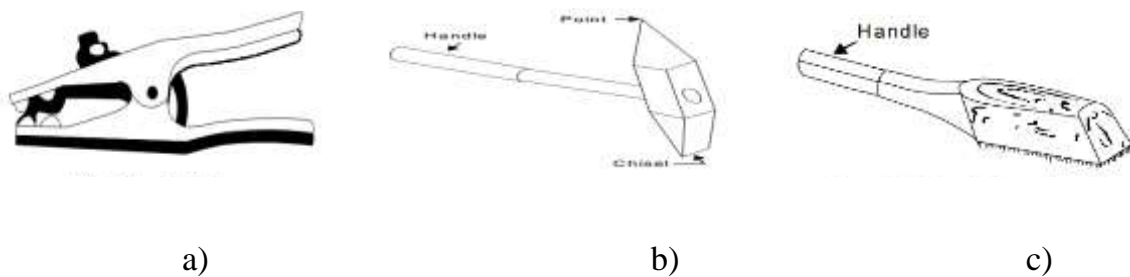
Some arc welding equipment a) Earth clamp b) Chipping hammer c) Wire brush
